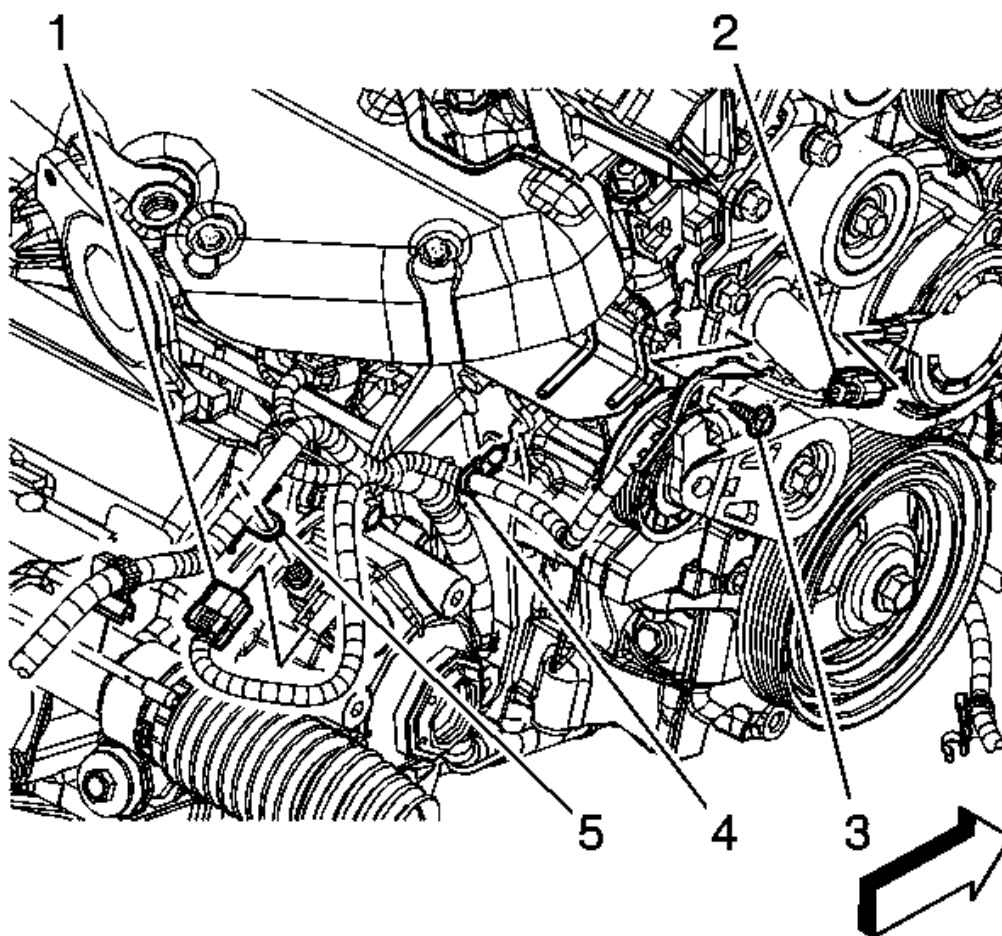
Camshaft Position Actuator Magnet Electrical Connector
